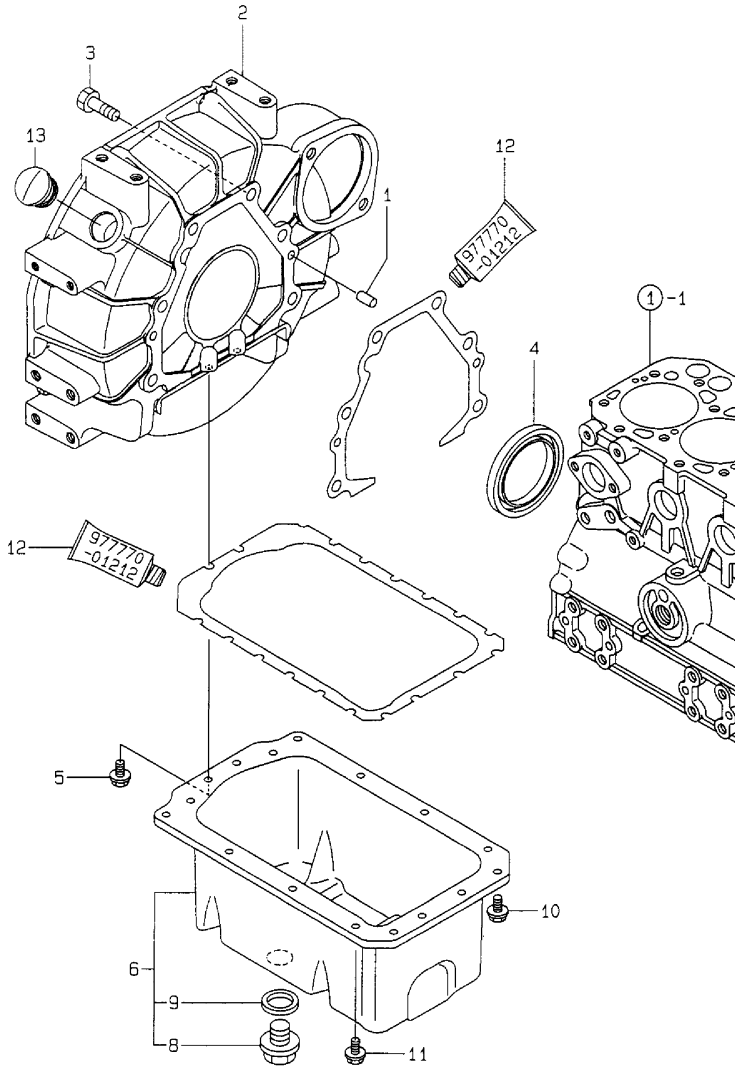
FLYWHEEL HOUSING & OIL SUMP
